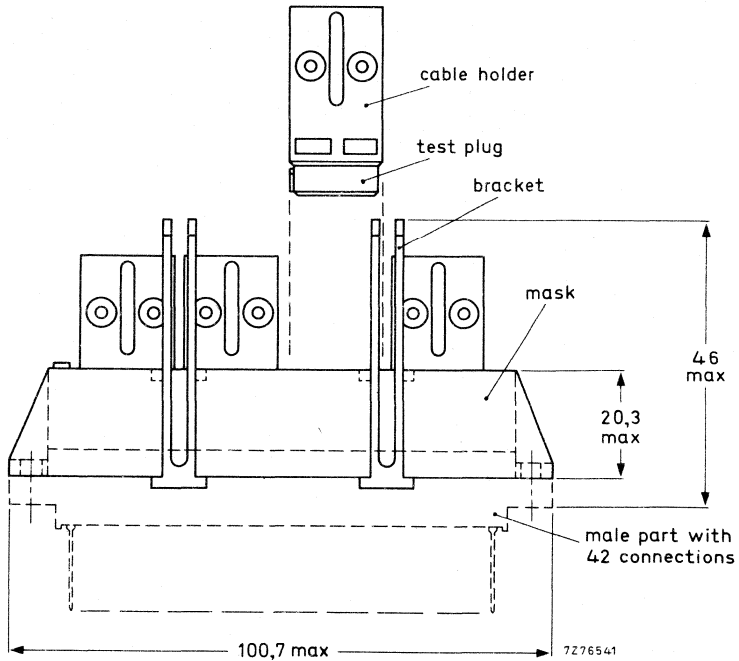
Four test plugs with auxiliary parts; dimensions in mm.
